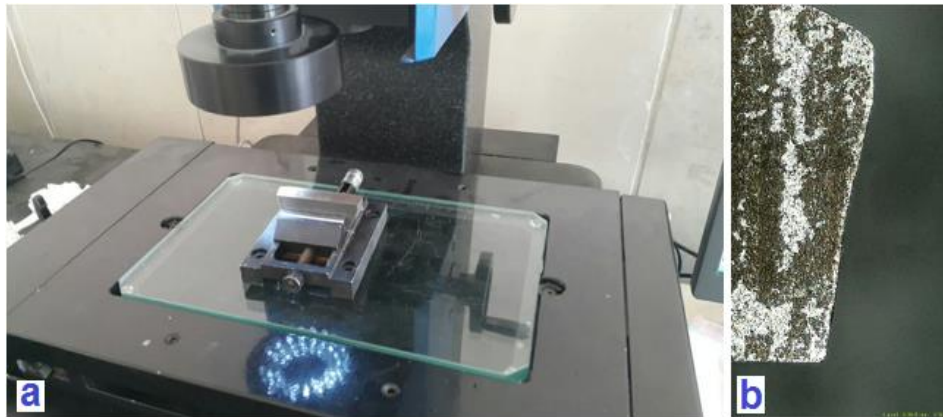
(a) The cut section of the blank produced in the VMM machine (Easson China, model C 2515) (b) The image of the cut section
